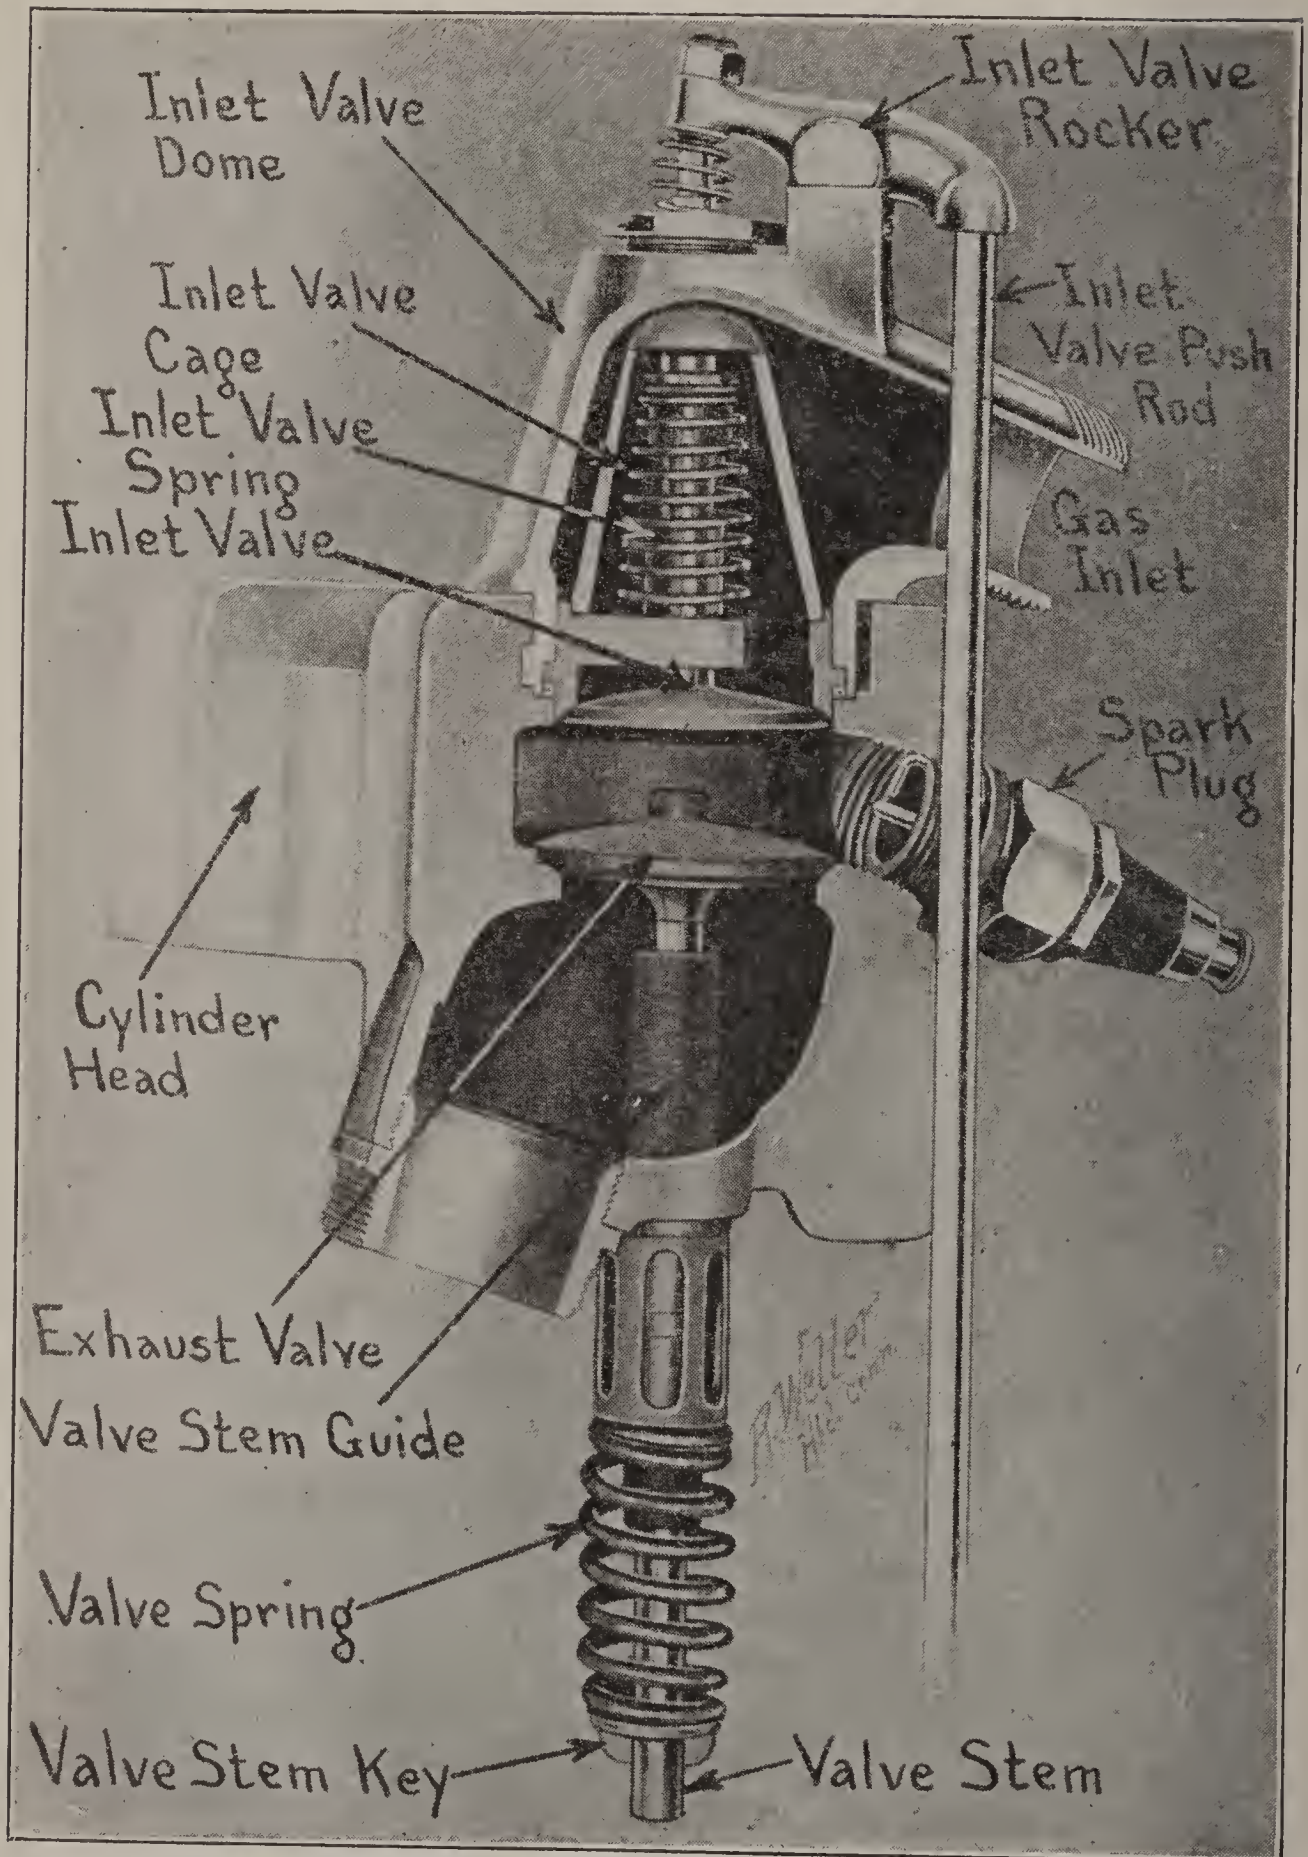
Detachable Combustion Head of the Indian Motor With Valve Chamber in Section to Show Arrangement of Intake and Exhaust Valves.
